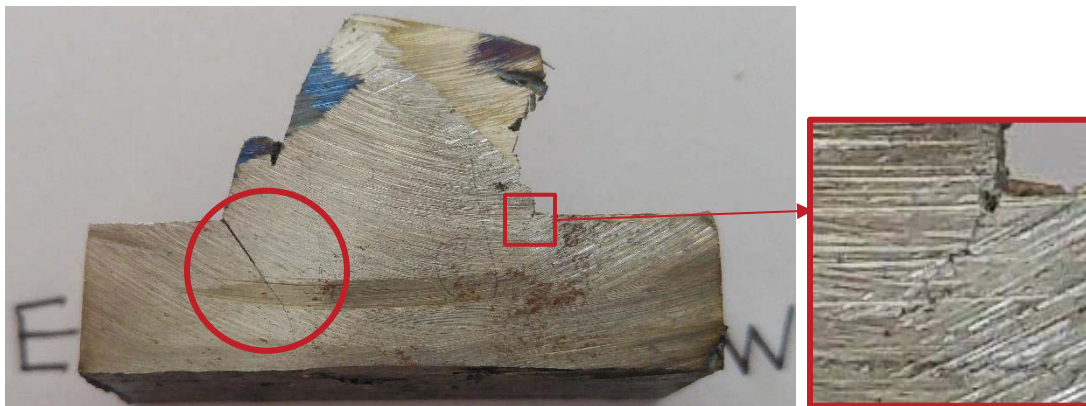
Cross-sectional cut made longitudinally through Stud S1 in Specimen P120.
